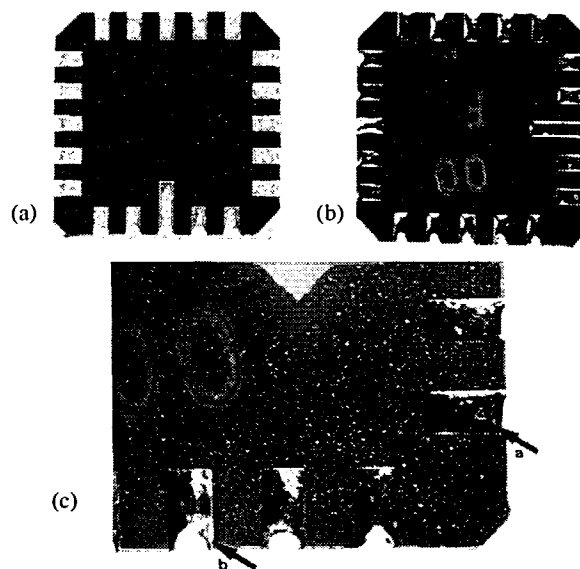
Optical photographs showing the bottom side of leadless ceramic chip carrier packages before and after the solderability test (steam ageing then solder dip utilising non-activated rosin flux 'R'). (a) As received. (x 3) (b) Following steam ageing and solderability test. (x 3) (c) Detail of (b) showing along side 'a' good flow of solder into castellations but some localised non-wetting of pad. Side 'b' shows poor flow into castellations and larger non-wetting areas on pad. (x 12).
